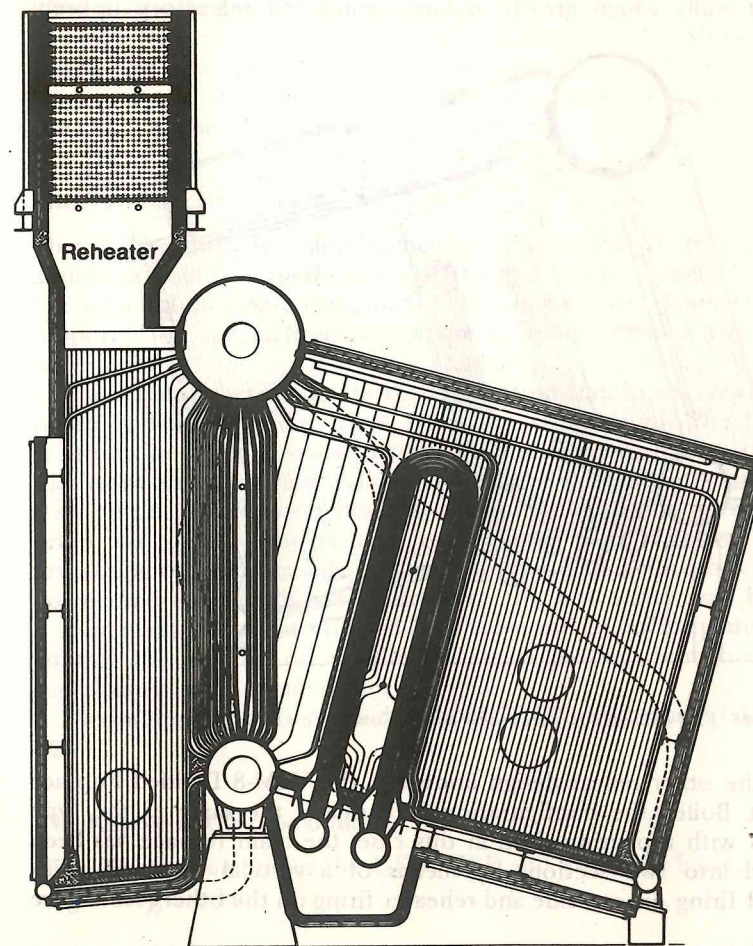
V2M-8 L.T.G. reheat boiler (Combustion Engineering)
